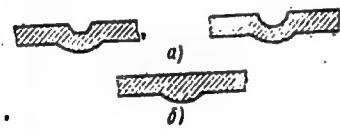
Types of protrusions (projections); a - conventional type employed in projection welding;
